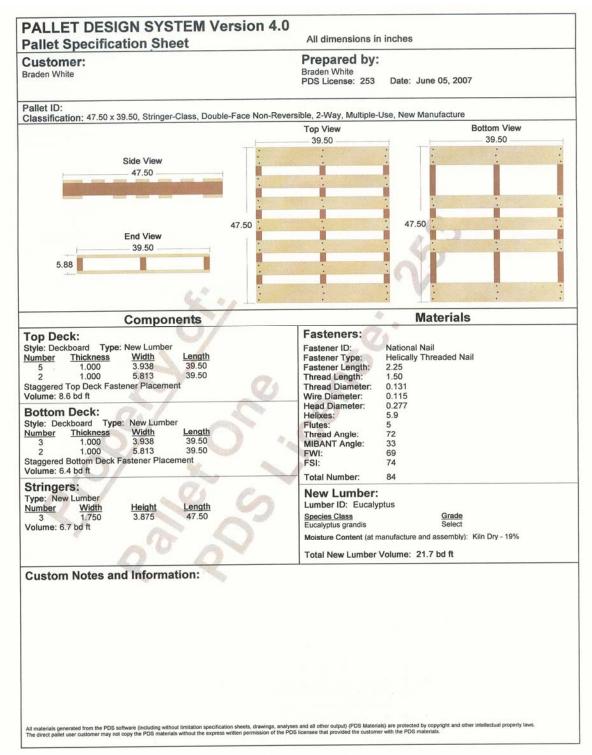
Heavy duty 3 stringer pallet design details (used with permission of PalletOne).
